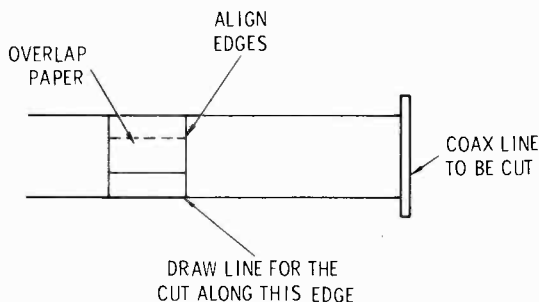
Mark coax line with a piece of paper as your guide in order in ensure a perfect circular cut.
